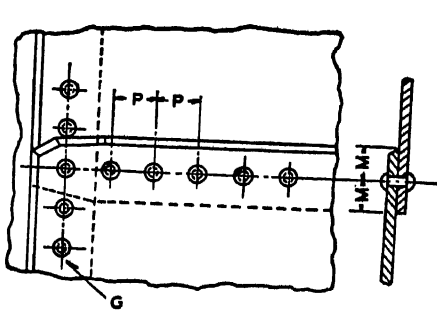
Single-riveted Lap Joint—Longitudinal.
